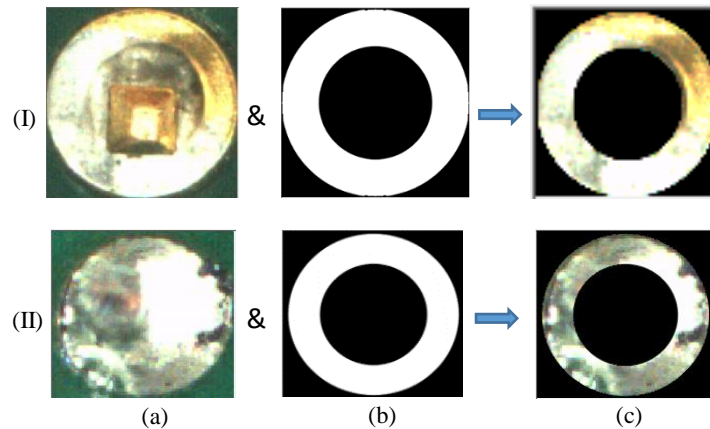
Image size reduction for solder void detection on solder pad. (a) Solder joint. (b) Binary masking image. (c) ROI
